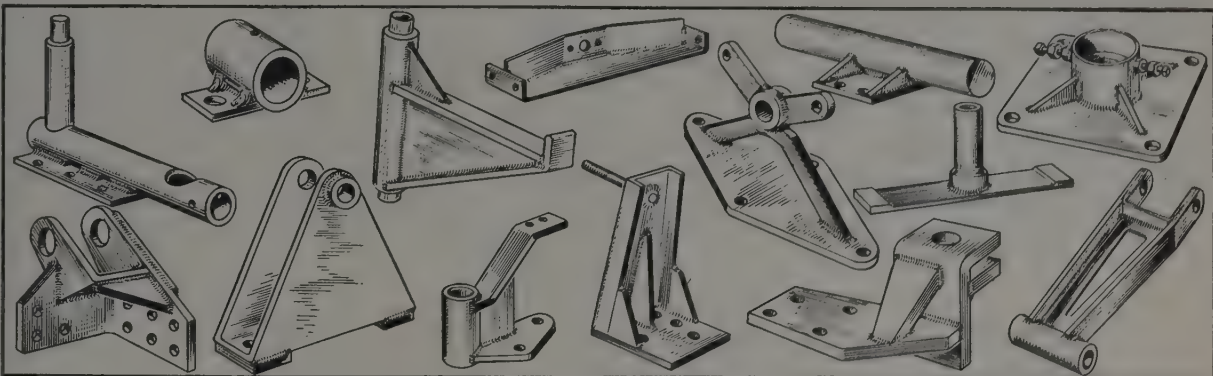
Typical machinery brackets for various applications built at lower cost with arc welding.
